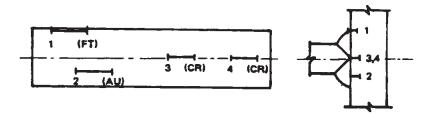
Ultrasonic Weld Inspection Record (Sheet 2 of 4)
